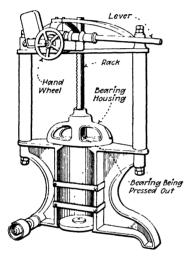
An arbor press which is very effective for removing sleeve bearings from their housings.
